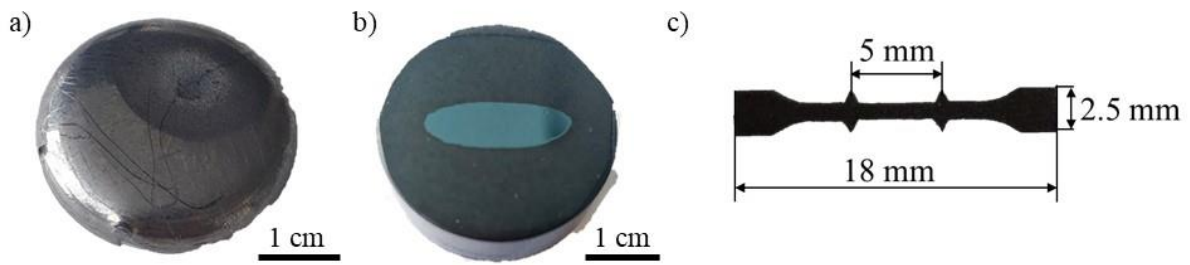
a) as-cast knob-shaped HEA-Fb specimen; b) cross-section of as-cast specimen; c) tensile specimen geometry
